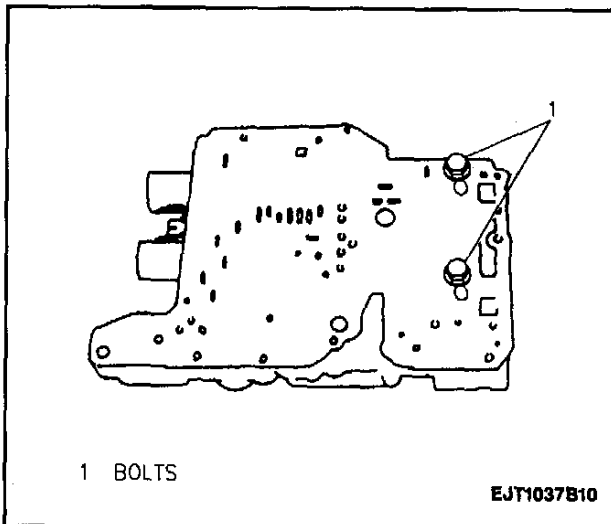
Installing Separator Plate and Gasket to Lower Valve Body (03-72LE, 4-Speed)
